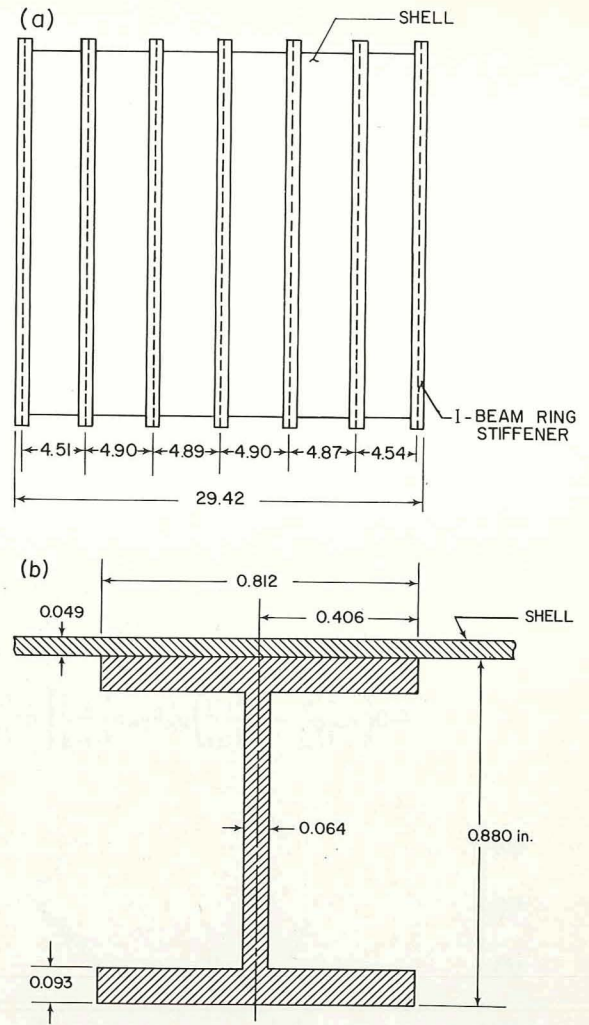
Structural details of ring-stiffened cylindrical shells. (After ref. 3.35) (a) Cross-sectional details of I-beam ring stiffeners. (b) Arrangement of rings.
